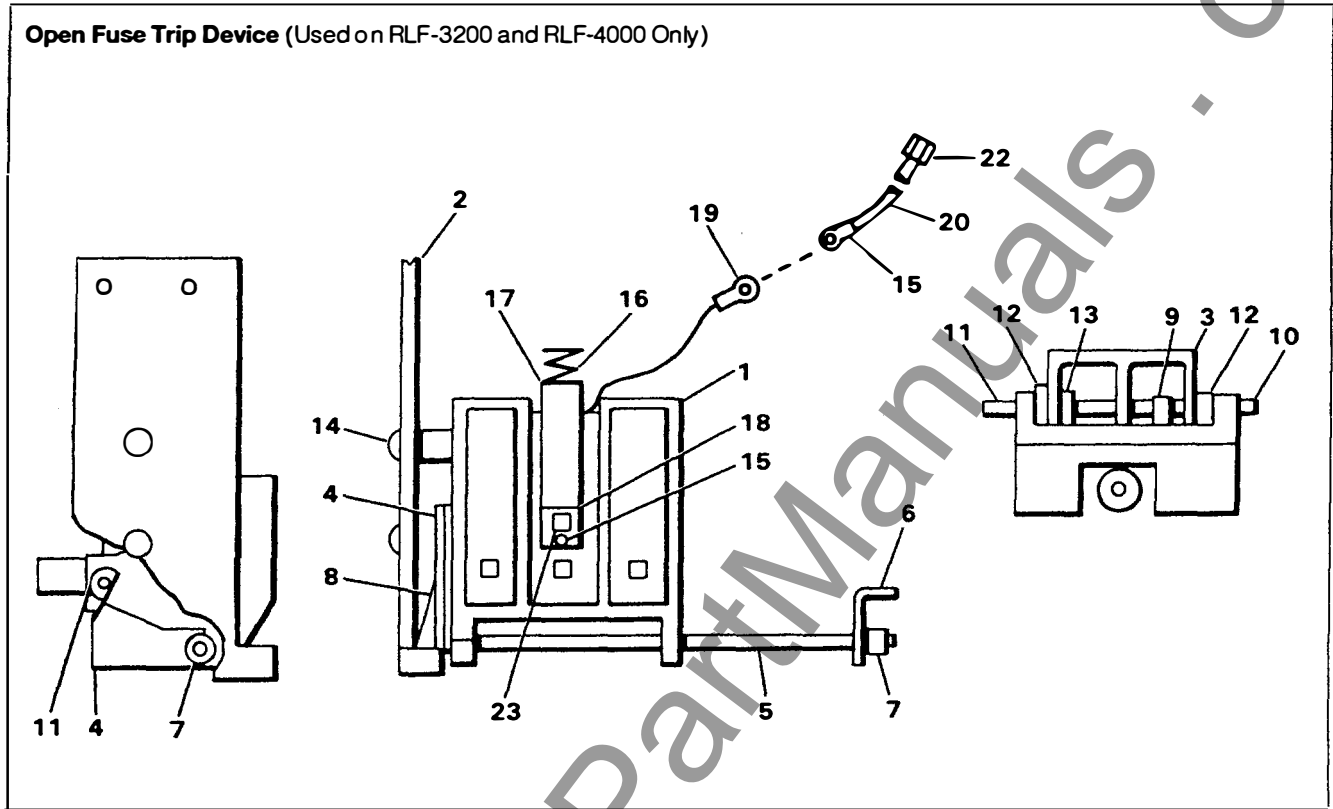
Open Fuse Trip Device, Trigger Fuse Assembly
